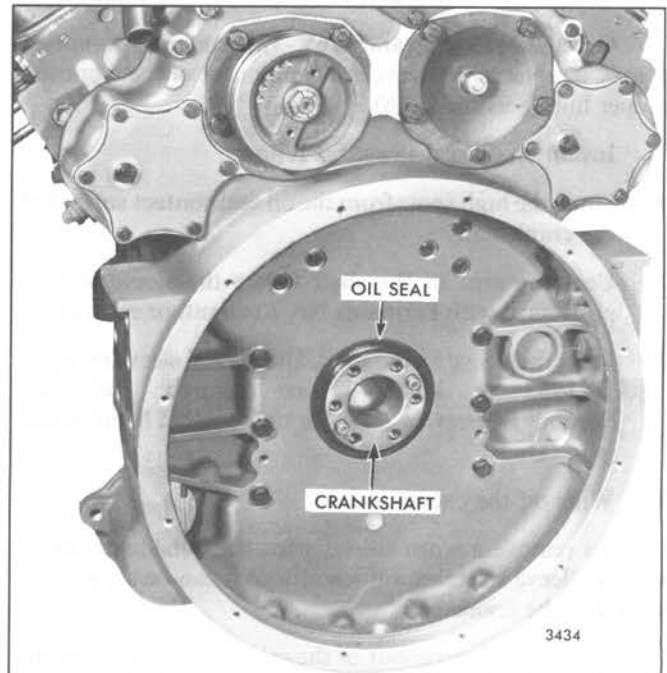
Crankshaft Rear Oil Seal Mounting
